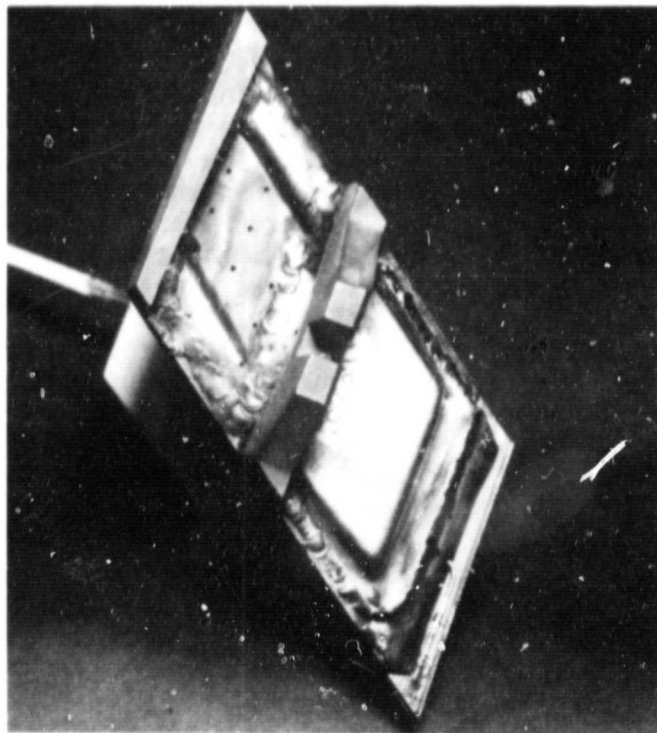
Completed Vane Inner Diameter Platform Assembly for Initial Engine Test - Interface temperature sensor installation is shown.
